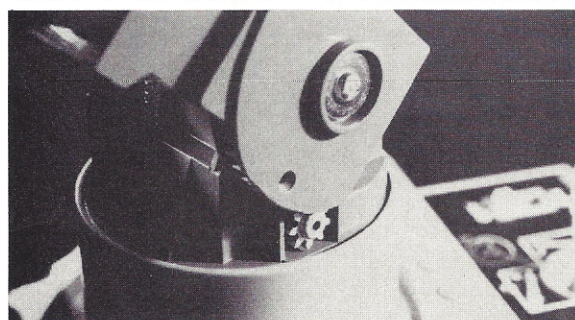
Close-up view of shoulder joint with decorative cover removed.
